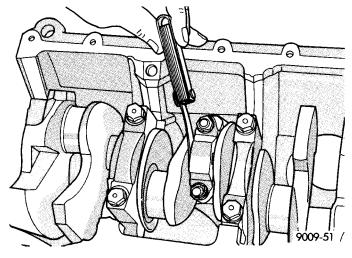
Checking Connecting Rod Side Clearance STANDARD PROCEDURE - FITTING PISTONS
